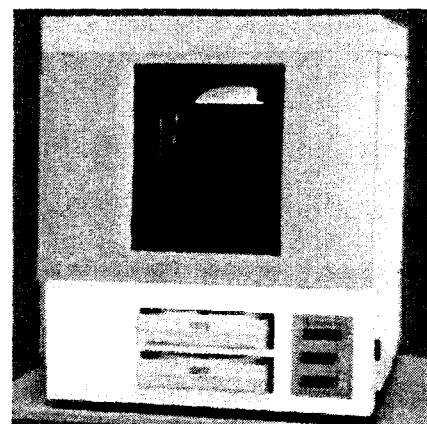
FDM Dimension Machine (Courtesy of Stratasys Ltd)
